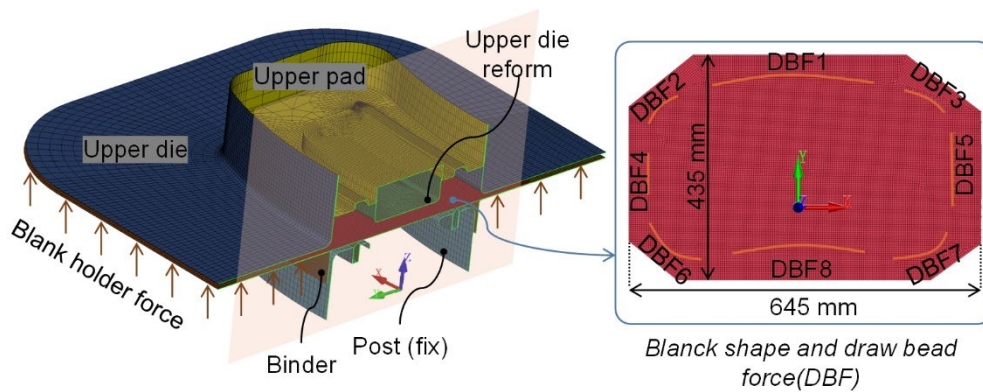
Cross-sectional finite element representation of the stamping assembly and initial blank geometry.
